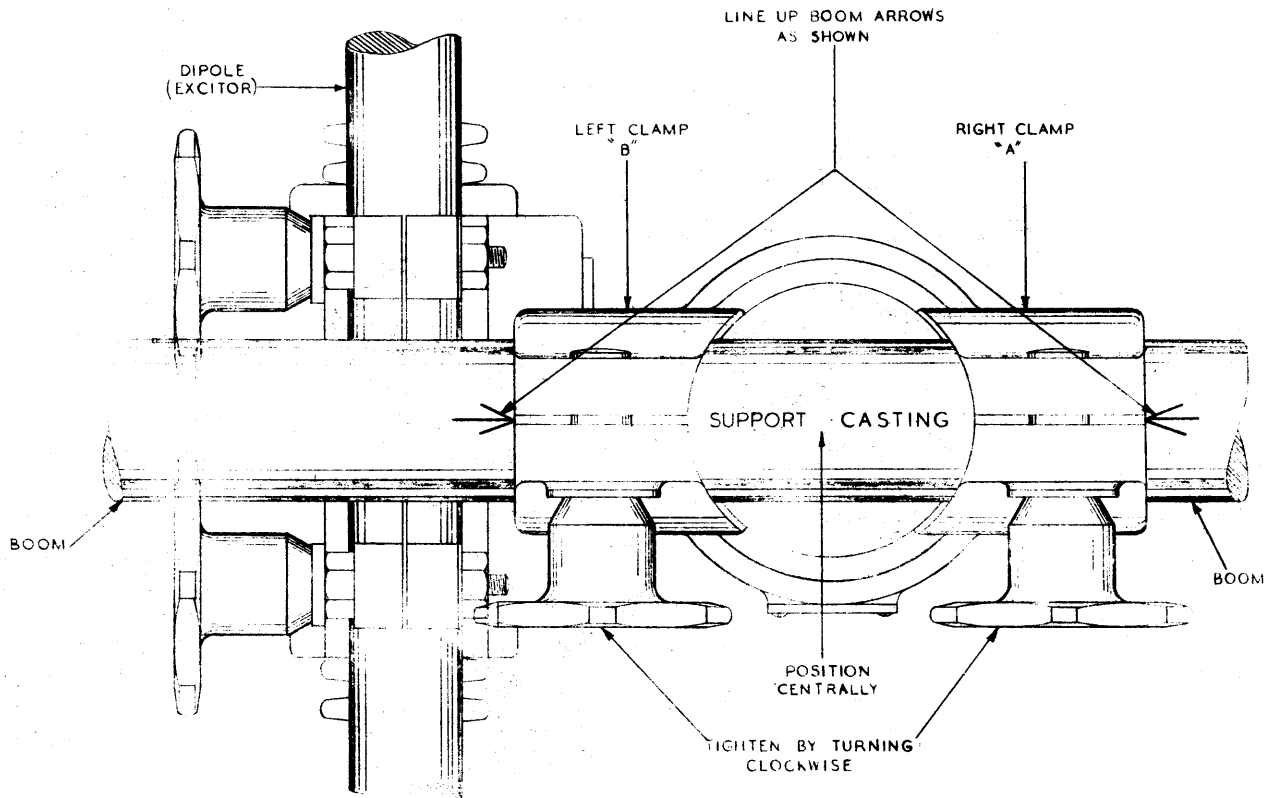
FITTING THE BOOM TO SUPPORT MOUNTING
